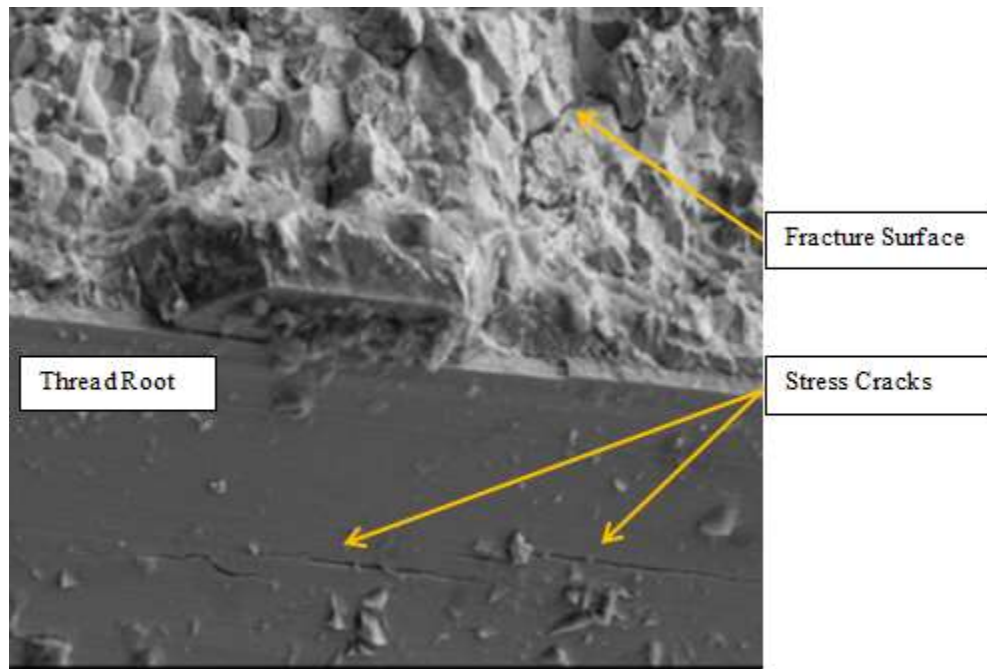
CRACKS OBSERVED IN THREAD AND THREAD ROOT NEAR FRACTURE (BSEE RCA)
